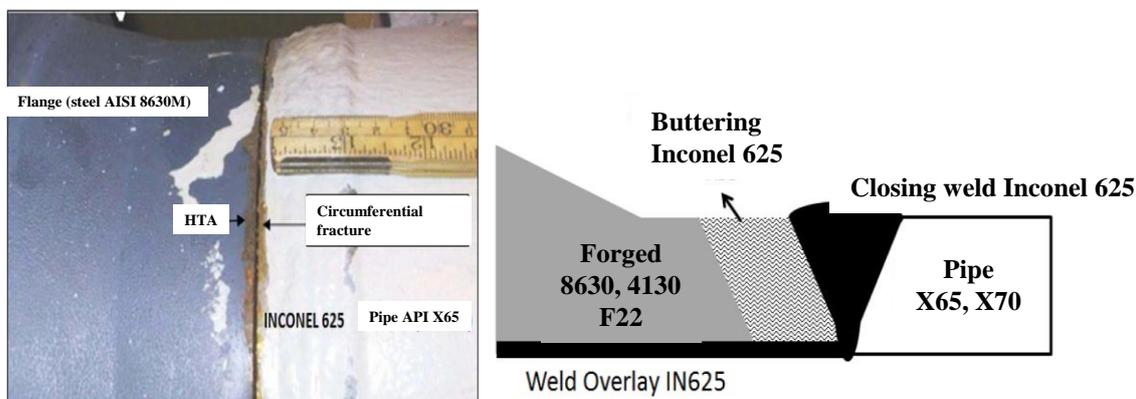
a) Representation of a dissimilar AISI 8630 / Inconel625 solder in the manifolds. b) Failures in offshore installations in the AISI 8630M / Inconel 625 steel flanges (Grittos, 2008)
